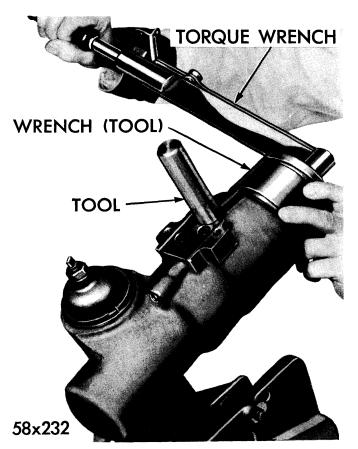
Alignment of Bearing Spacer and Center Bearing Race with Aligning Tool C-3649
